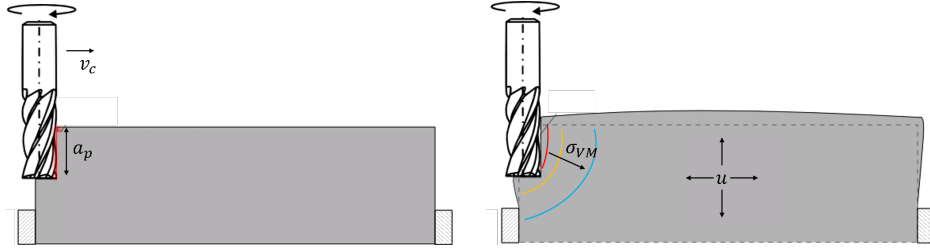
Left:* Milling rotating tool and its main parameters illustrated over the original geometry of the component. *Right:* Illustration of thermomechanical effects on the component resulting in thermal expansion and stress
